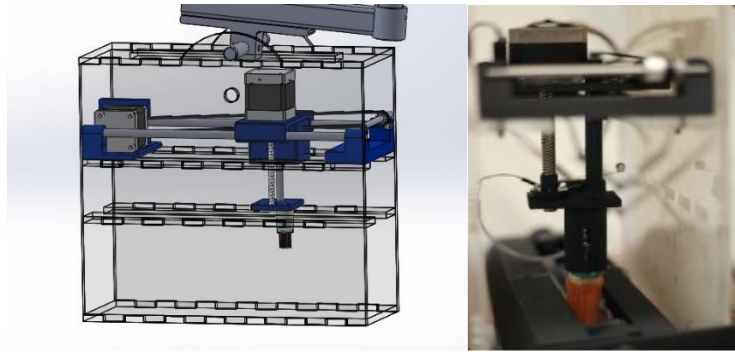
a) A CAD drawing of the mechanism; and b) the fabricated system
